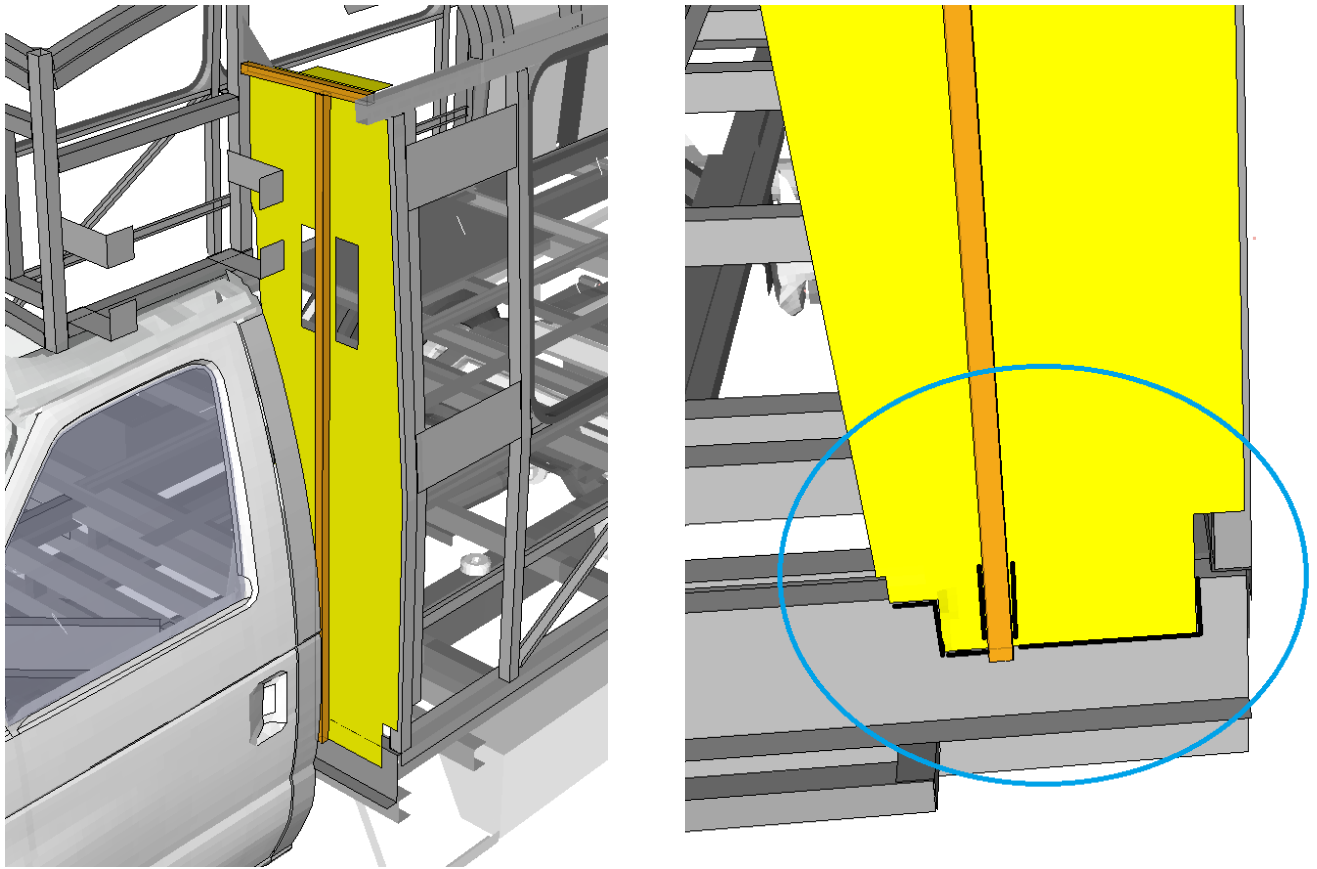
Side panel improvements (left), additional column, and panel welding required (right).
